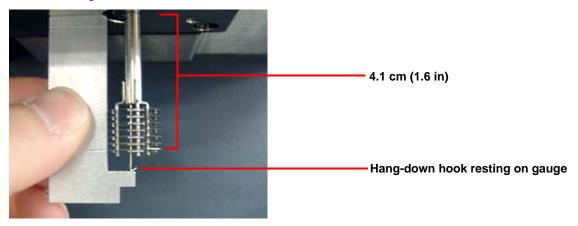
Proper positioning of alignment gauge and upper furnace assembly.
